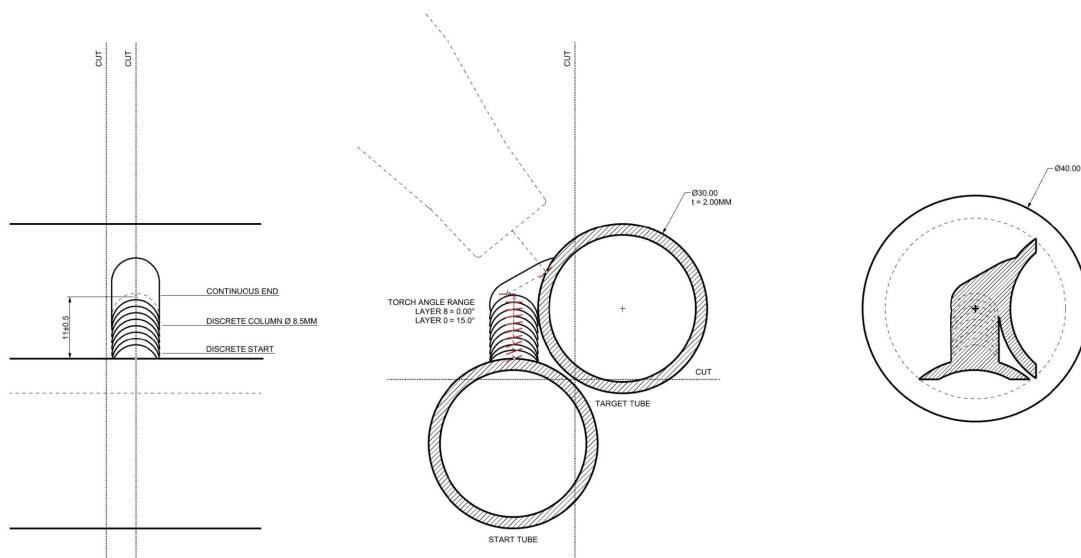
Primitive connection: front view with sections (left), cross-section view with tool_orientation ranges (center), final specimen (right).
